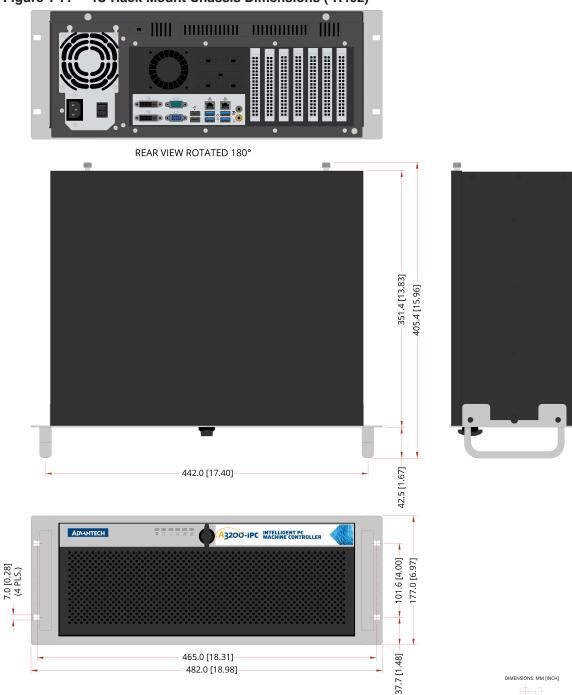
4U Rack Mount Chassis Dimensions (-R402)
